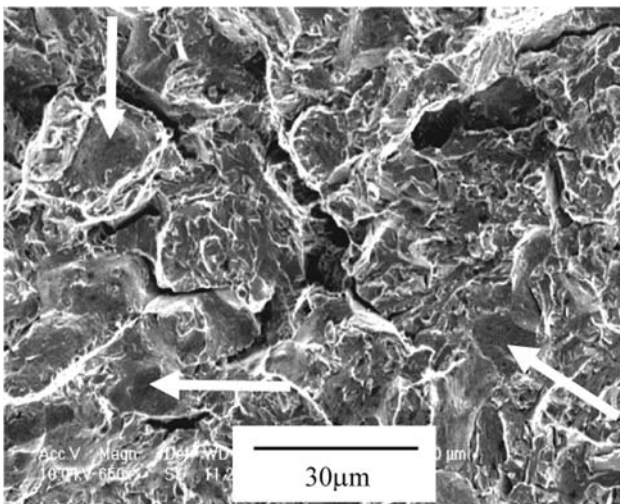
Fractograph on LQTE200 specimen showing the mixed mode of fracture (transgranular cleavage and intergranular decohesion marked by arrows)
